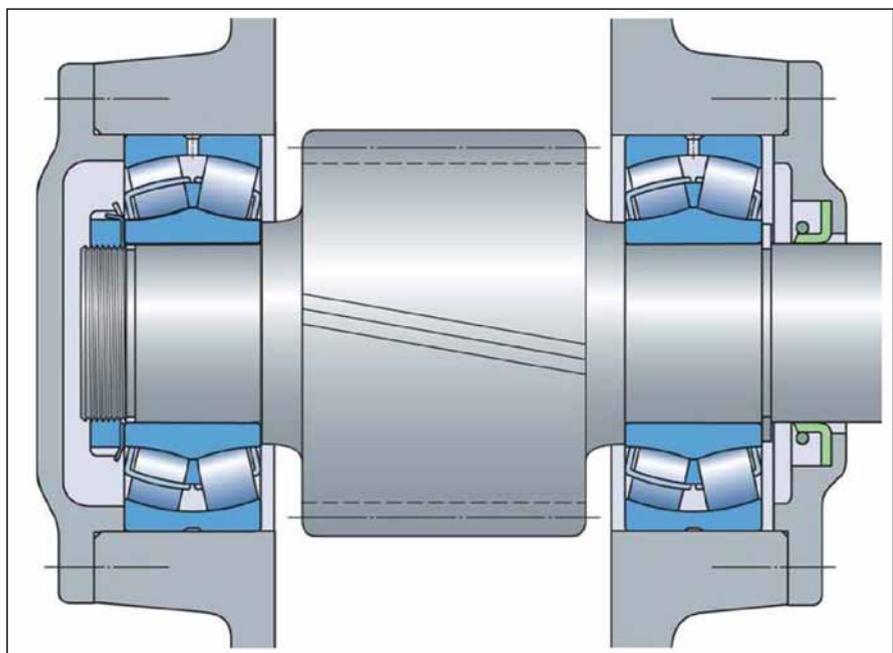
Two spherical roller bearings in “cross-locating” arrangement.
